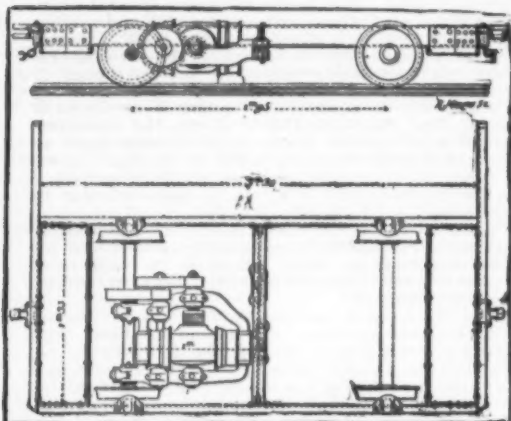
ELEVATION AND PLAN OF THE TEN MOTIVE TRUCKS OF THE MOVABLE SIDEWALK.
